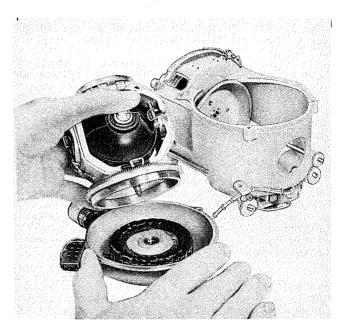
M. Installation of Gyro and Gimbal Assembly Into the Cap and Stator.
